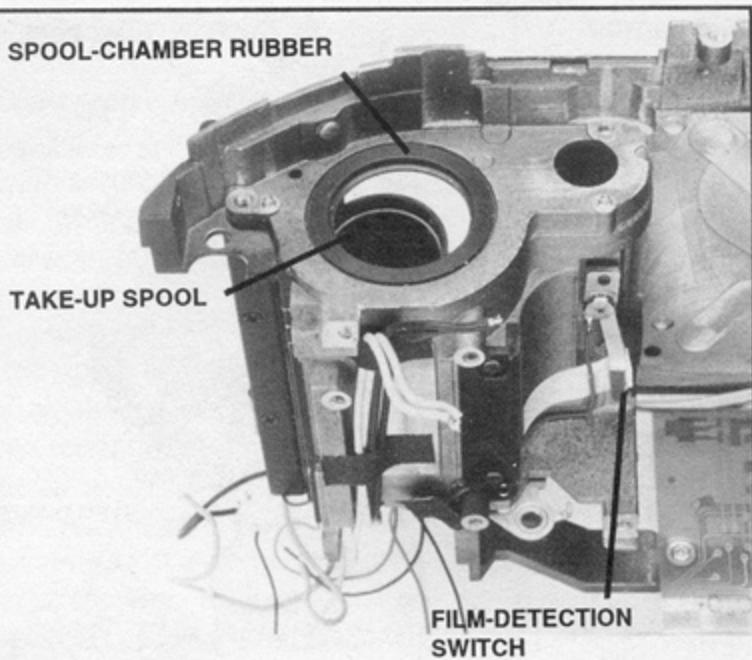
CAMERA BODY, FILM-ADVANCE UNIT REMOVED
